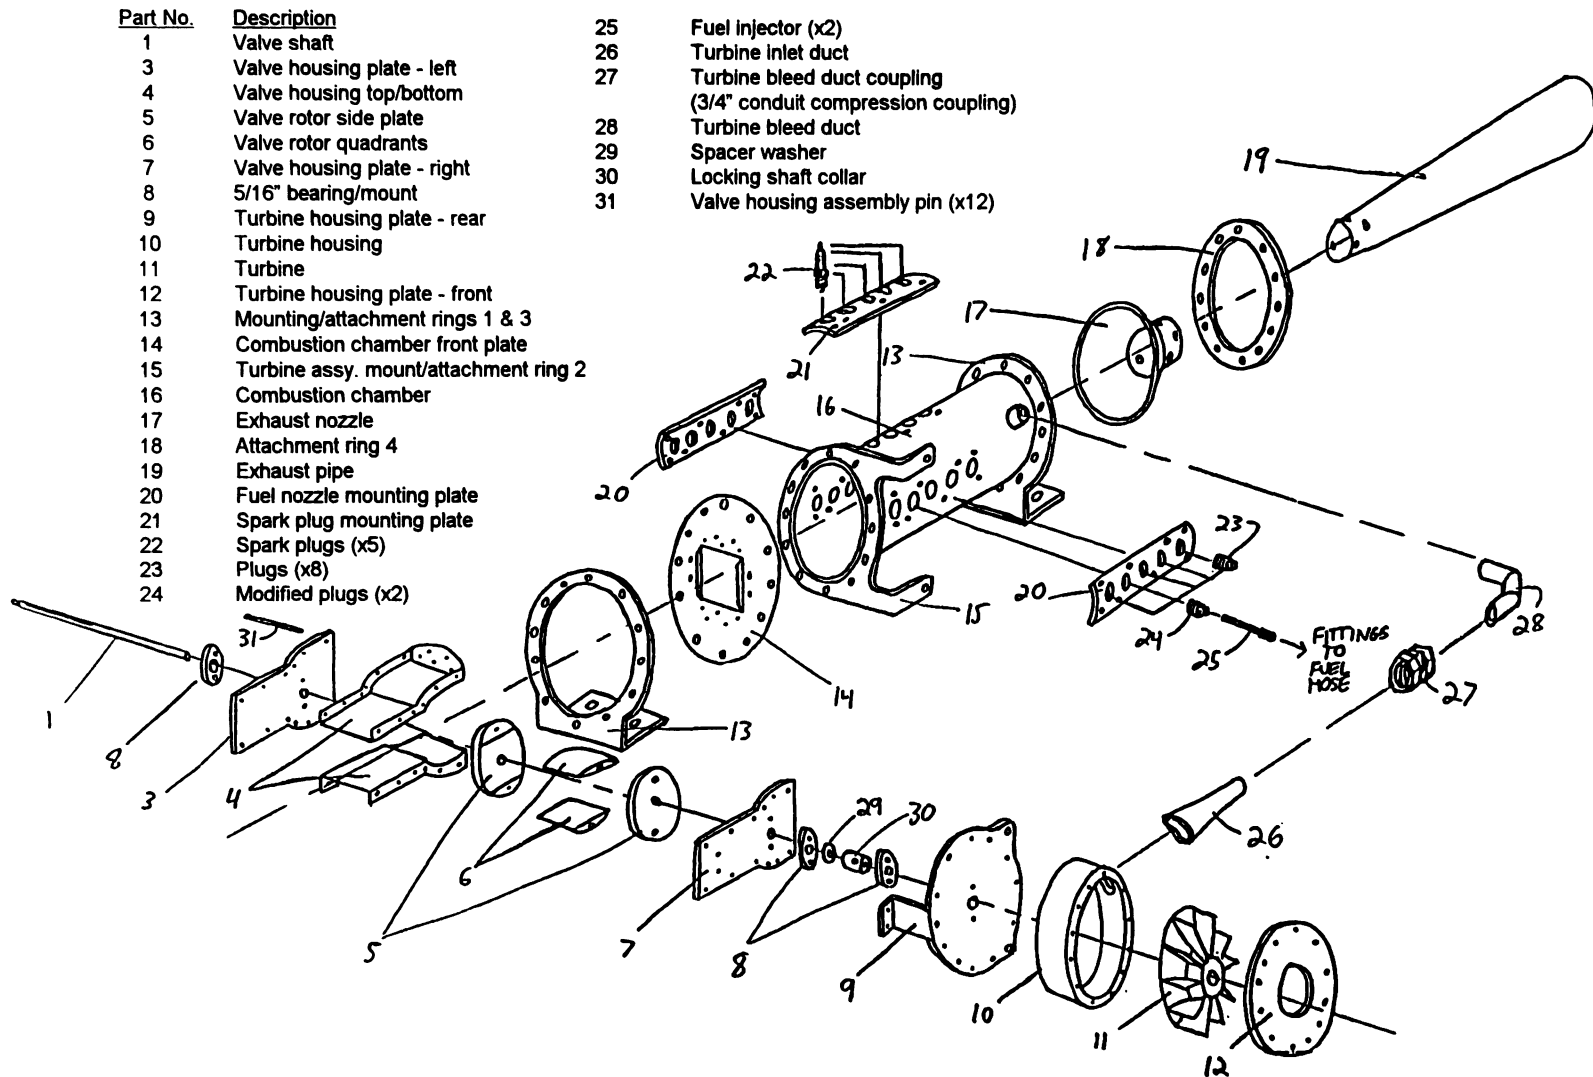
Astra Component Assembly with Ported-Rotor Valve System
